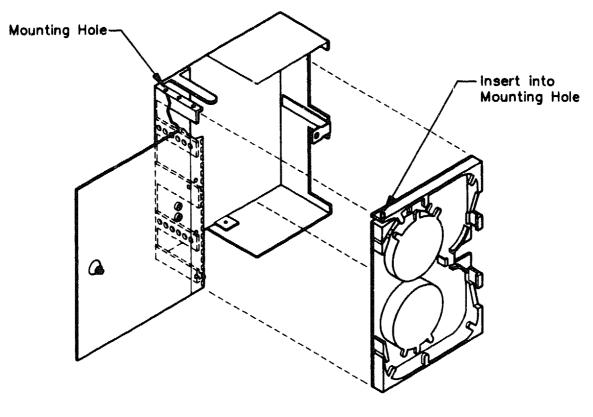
Installing the Splice Tray and Adapter Tray Holder
